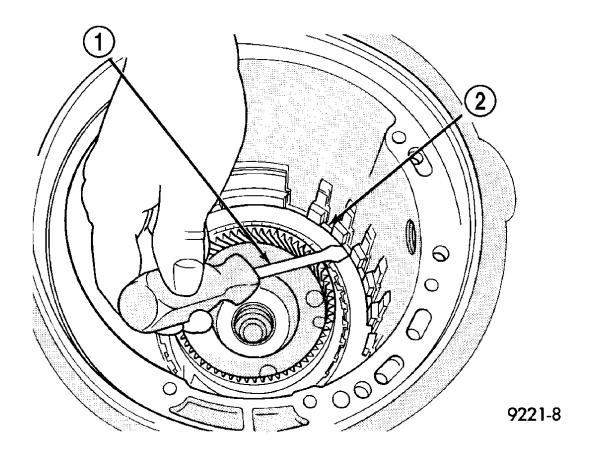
Installing New Tapered Snap Ring (Tapered Side Out) Courtesy of CHRYSLER LLC
